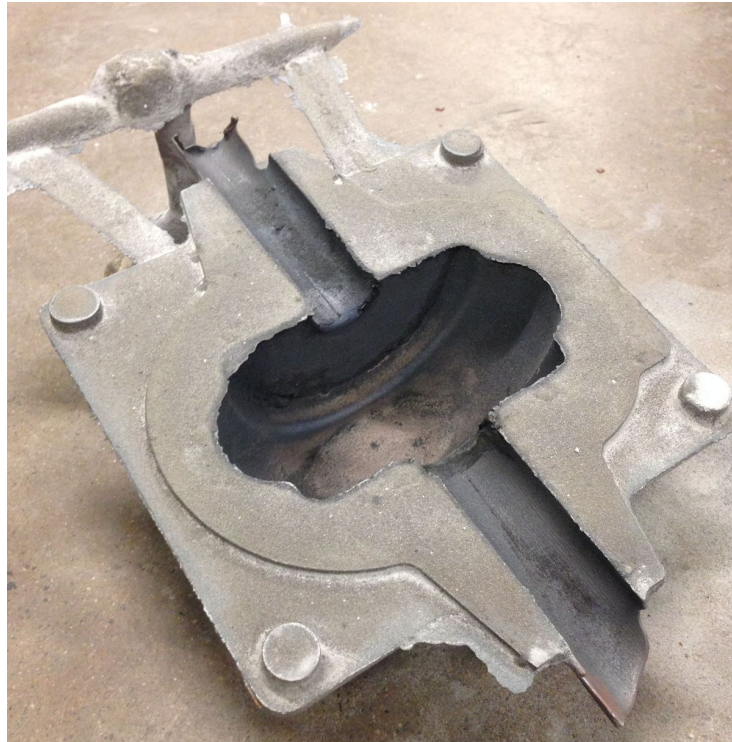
Lower base pattern designed and machined by Kyle Joba-Woodruff; Spring 2016.
